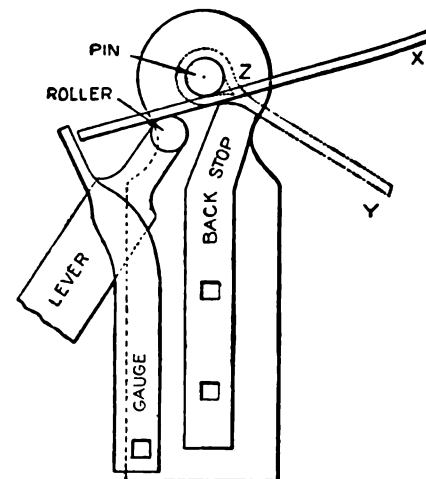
METHOD OF USING EYE-BENDING TOOL.
